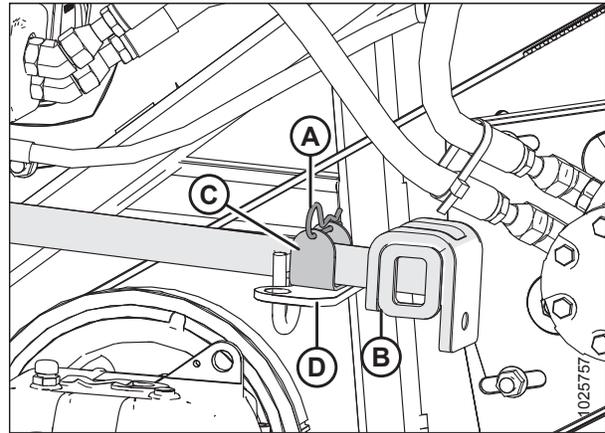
Knife Guard Straightening Tool in Storage Position (with Existing Bracket)
